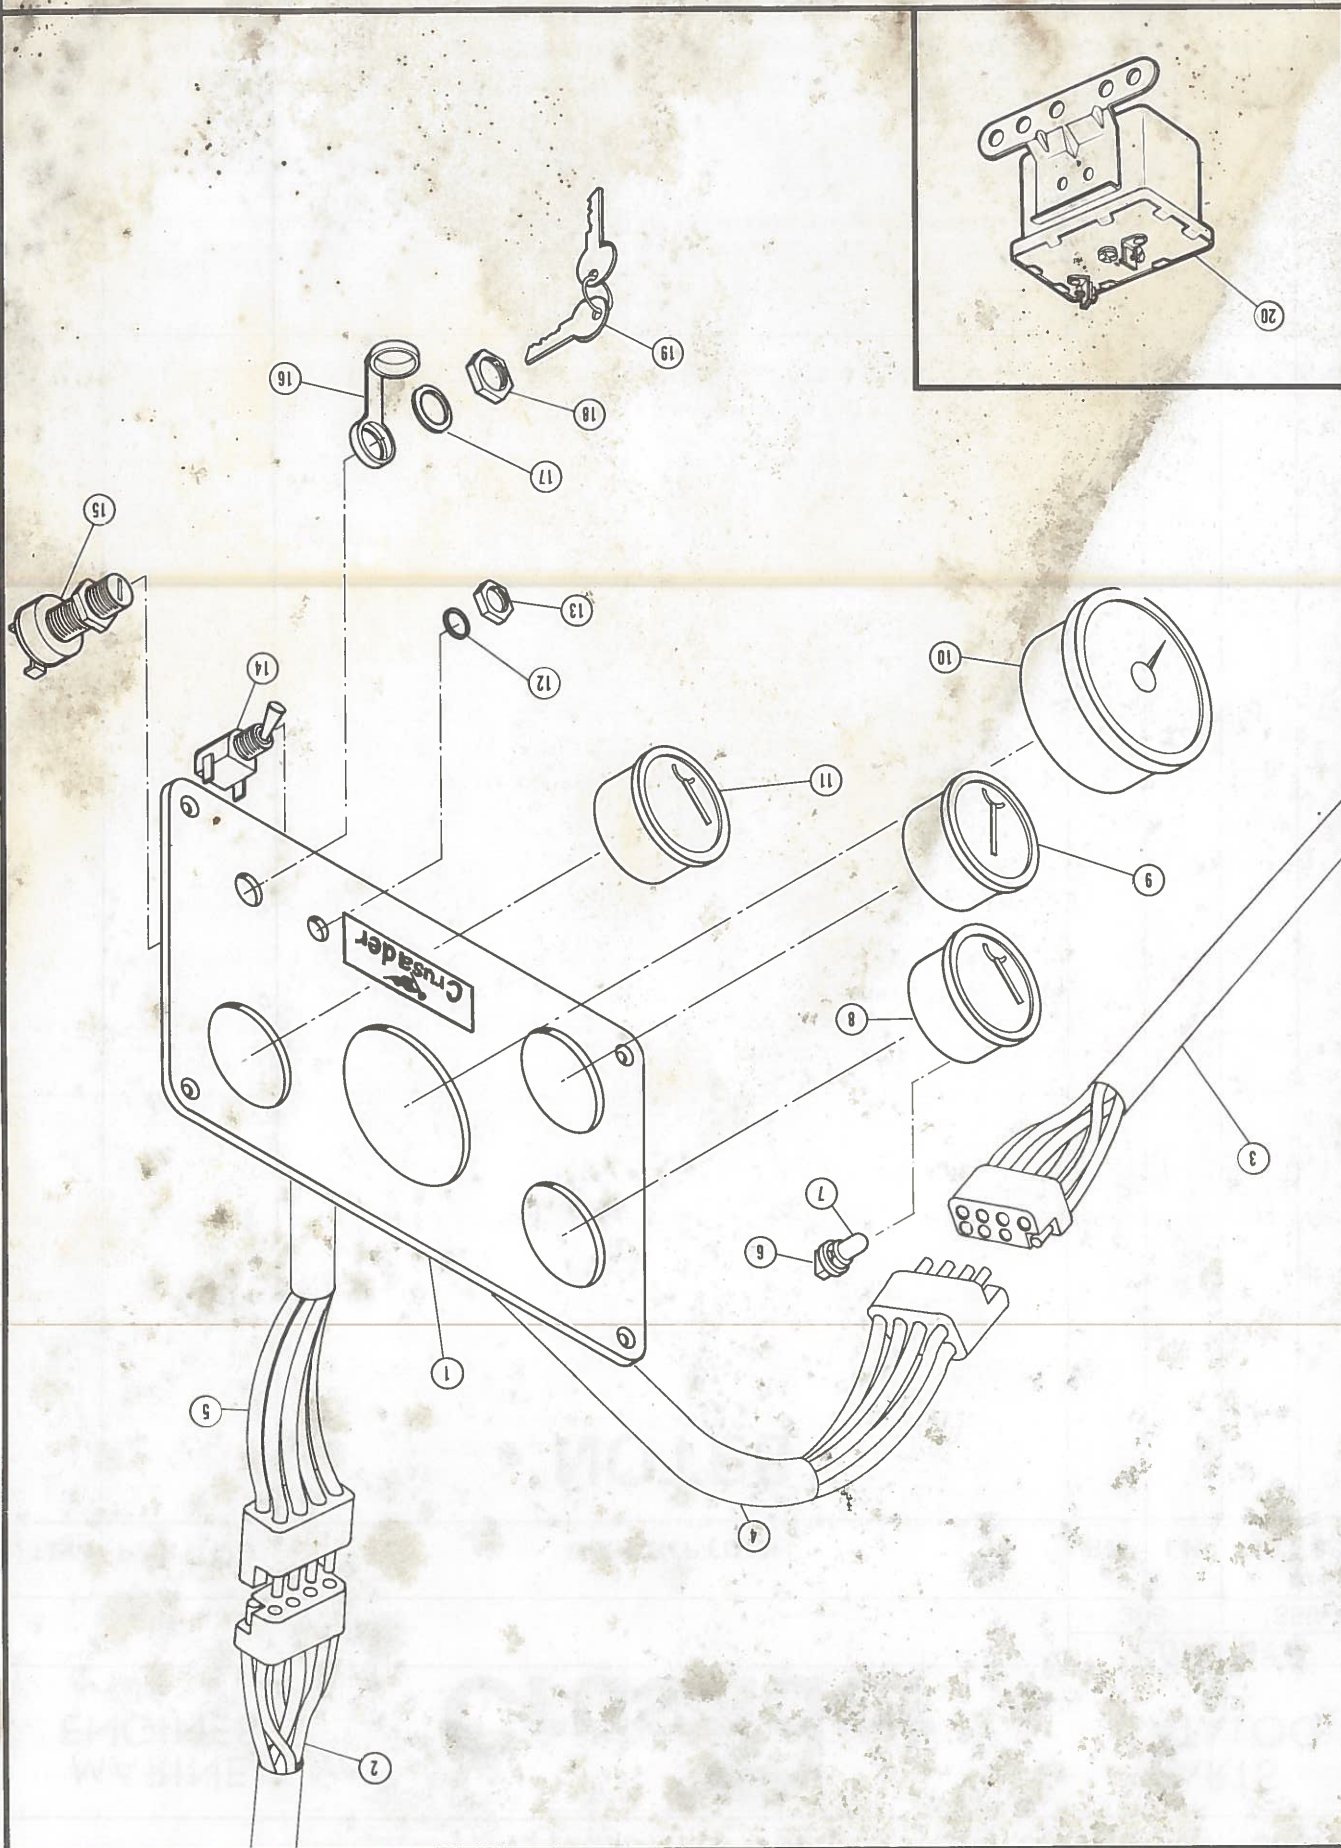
INSTRUMENT PANEL ASSEMBLY
